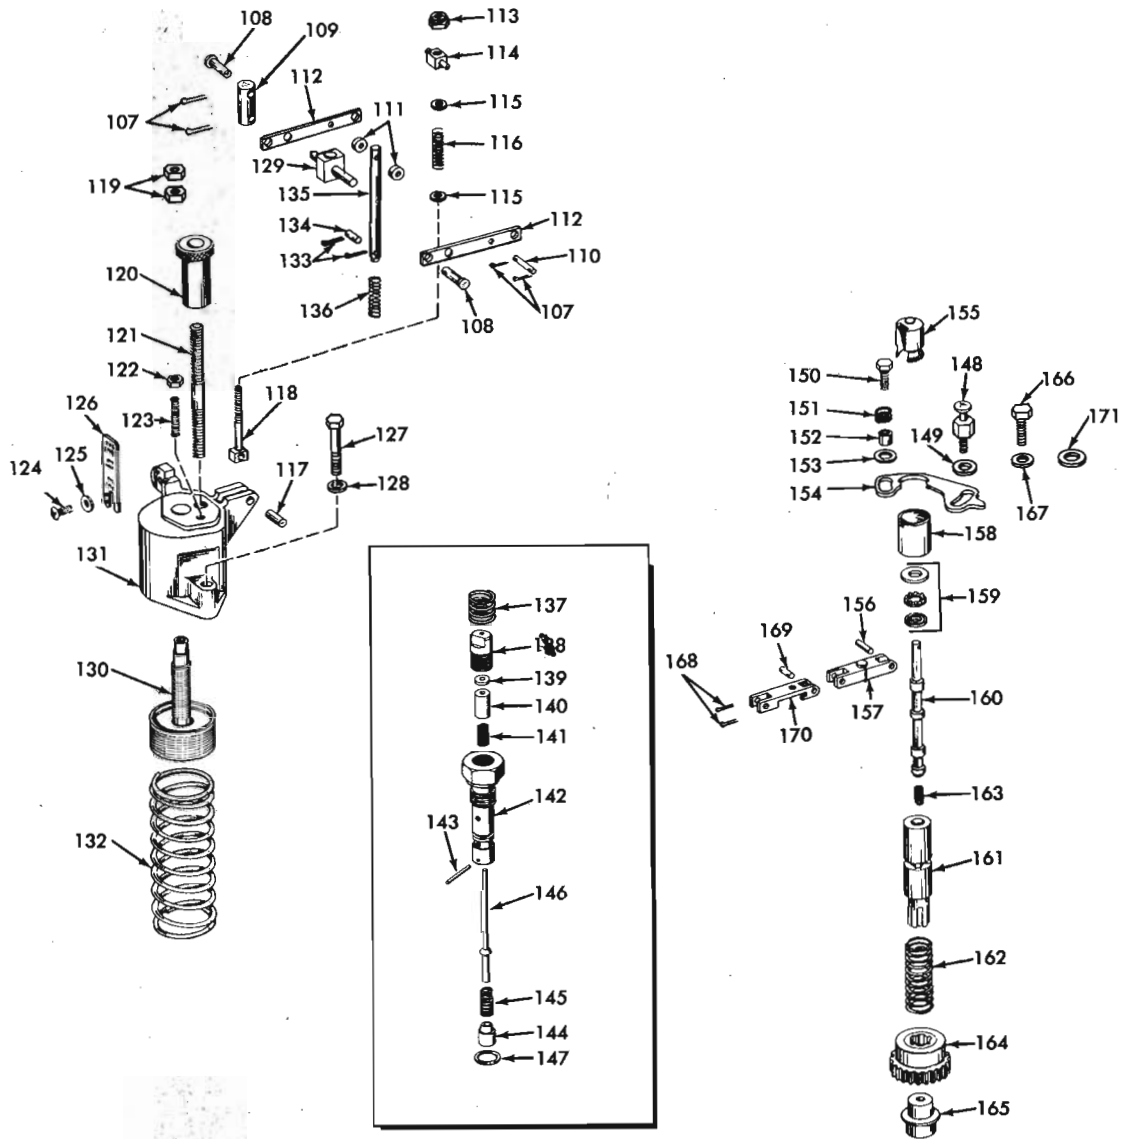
Speed Setting Servo, Bypass Valve, Speed Setting Pilot Valve and Bushing
